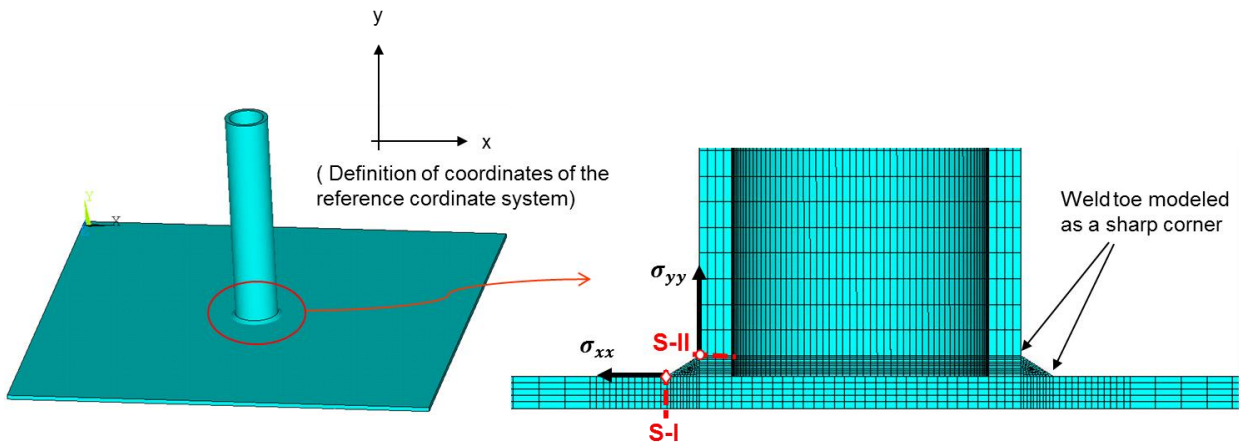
The coarse FE mesh model of the tube-on-plate welded joint (left picture) and cross sections of interest near the weld toe and stress notation (right picture)
